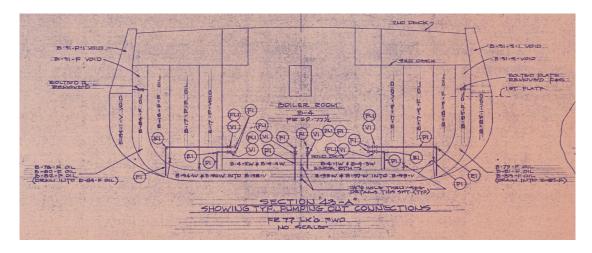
Typical Cross-Section Drawing of "Commonized" Pumping System Installed on Vessel
